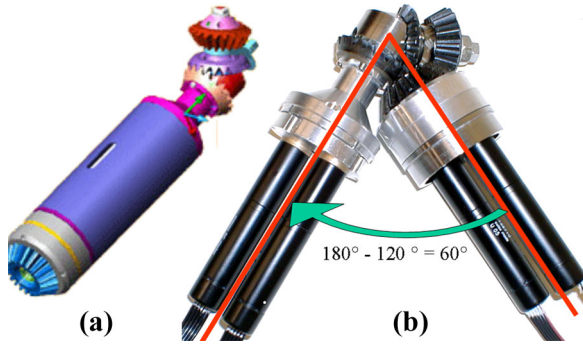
(a) 3D model of the our latest joint design. (b) Actual prototype of the joint.
